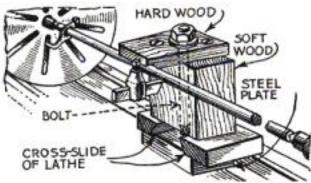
illustrates the use of a box tool in the engine lathe. A tool of this type may be rigged up for many small manufacturing jobs, such as turning, facing, and cutting off small pins, small bushings and similar jobs. Many variations of this tool are possible and with different size guide bushings, many sizes
